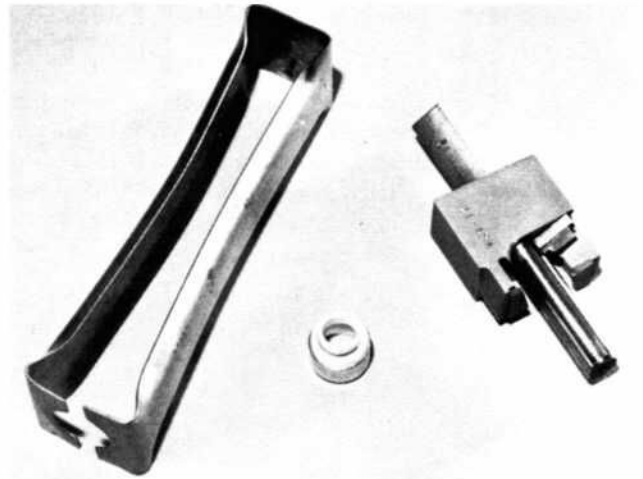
Special cutter and installation tool for Perfect Circle oil seals.
